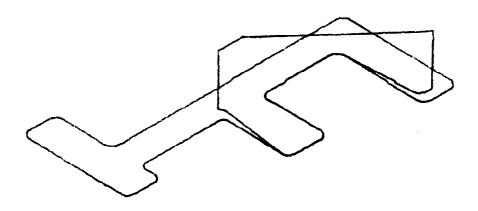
CUTTER TOOL PATH TO MACHINE A TEMPLATE
